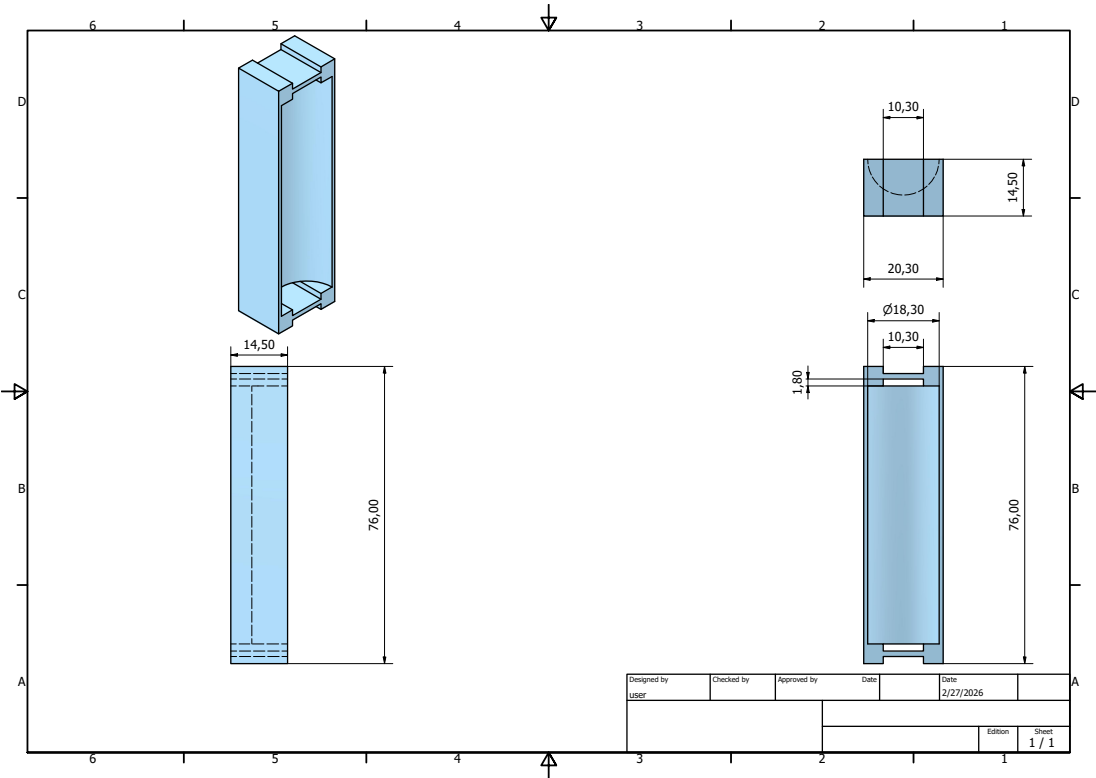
Mid battery support bracket – 2D manufacturing drawing with title block
